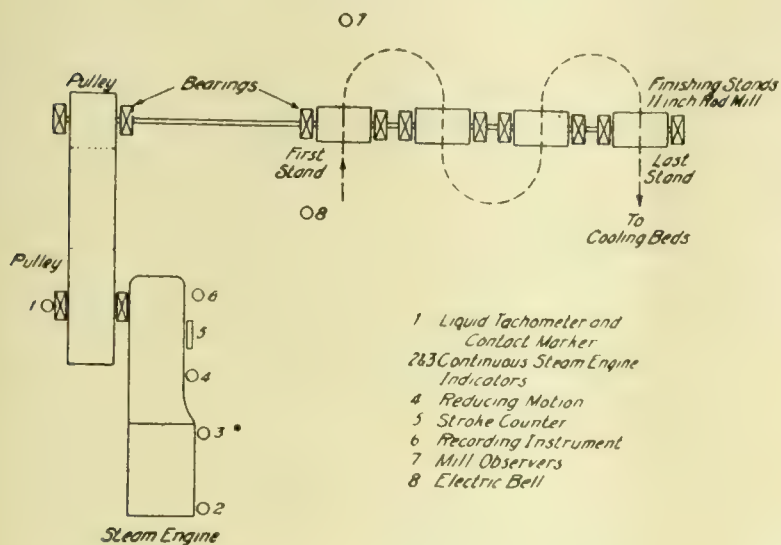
ARRANGEMENT OF FOUR FINISHING STANDS OF AN 11 IN. ROD MILL.
